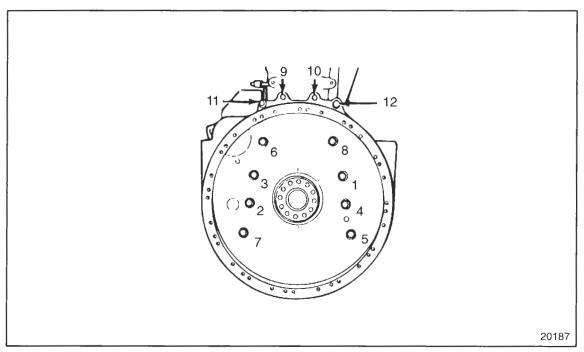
Flywheel Housing Bolt Torque Sequence
